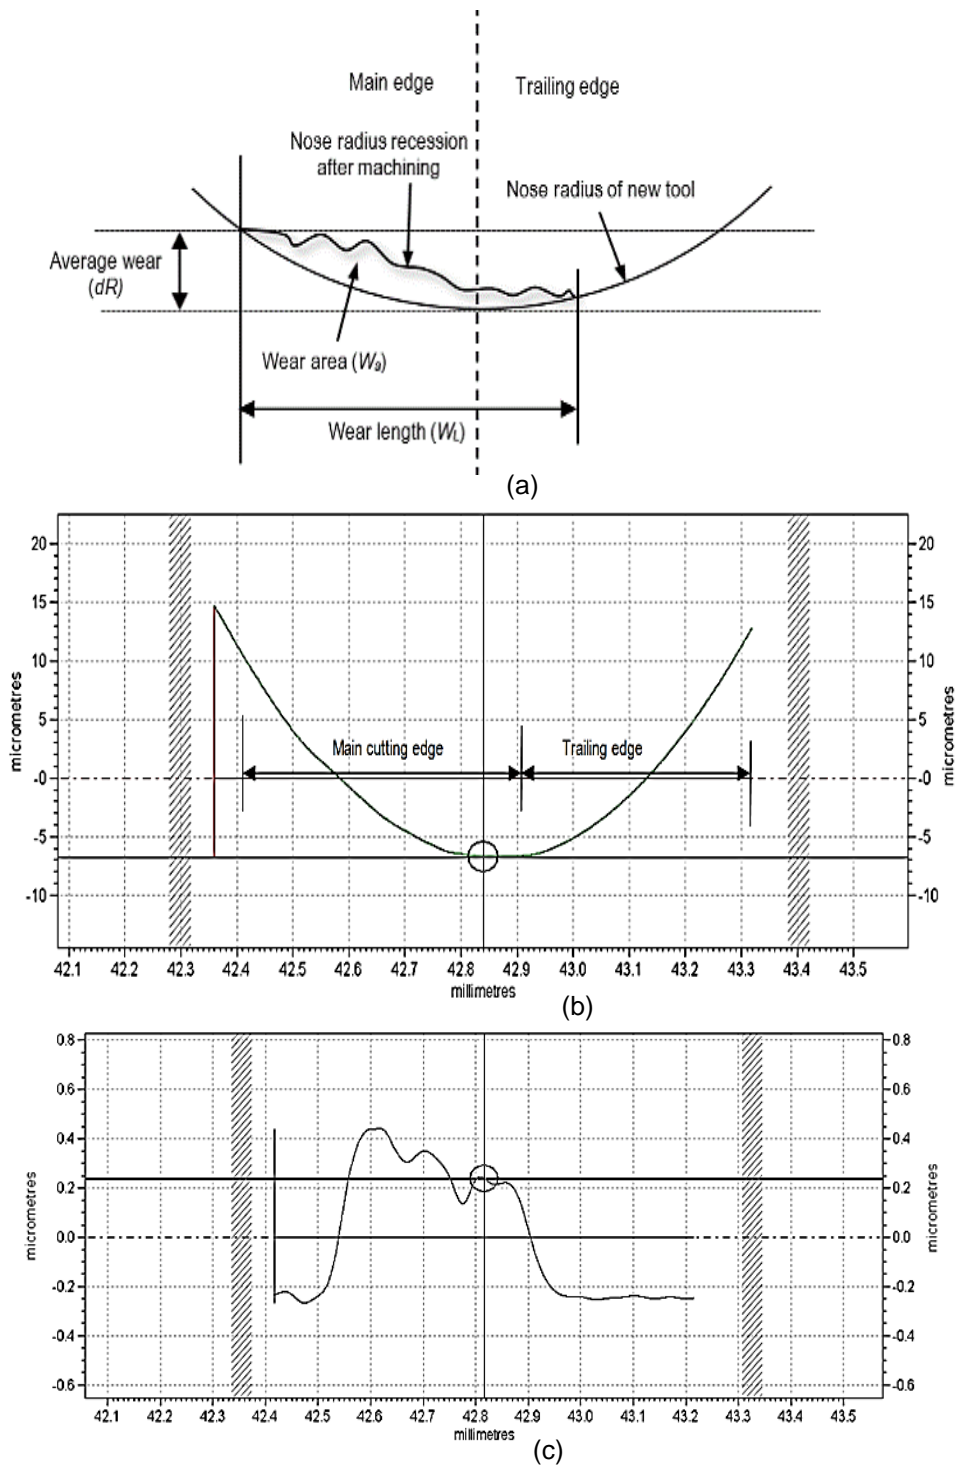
Estimation of tool wear (a) schematic illustration of the tool edge recession (b) Plunge profile of worn tool after 5km (c) Zoomed-in image showing worn area of the main cutting edge
